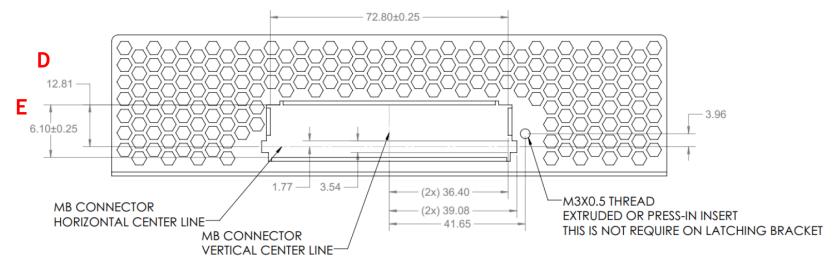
SFF Baseboard Chassis CTF Dimensions (Rear View)
